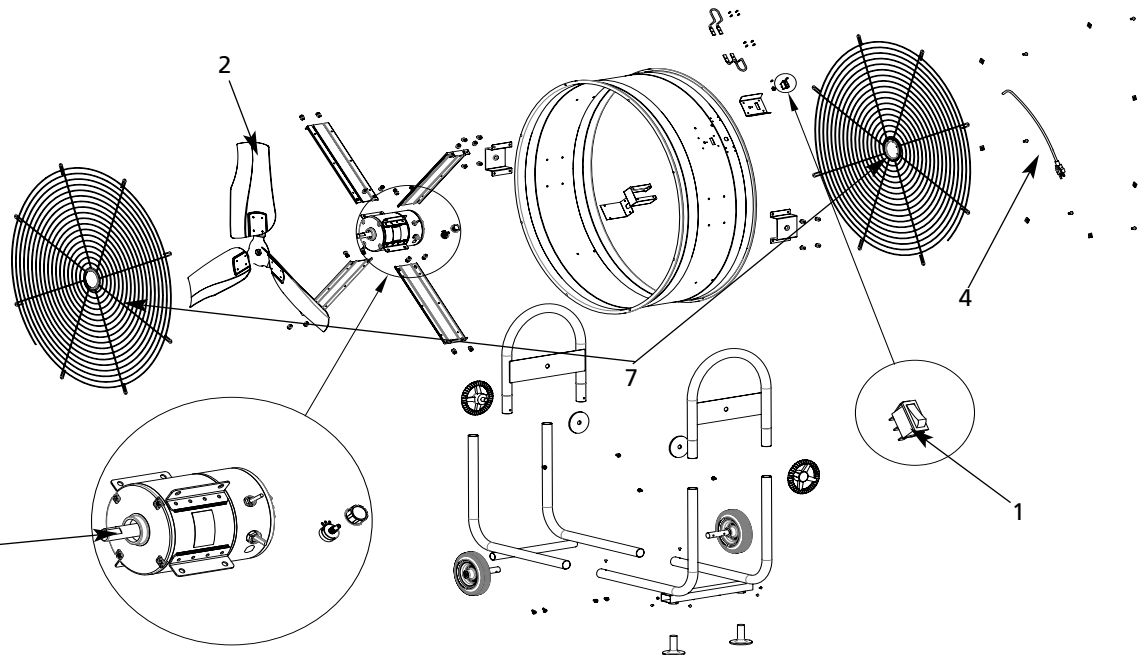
Repair Parts Illustration for BLDC Mobile Air Circulator 31XL42
